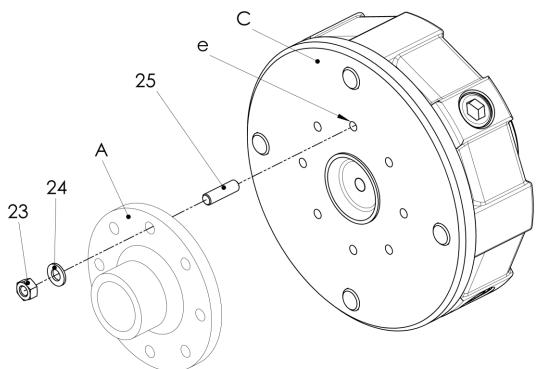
Screwing together the coupling and the transmission flange (A) using the stud screws (25)
